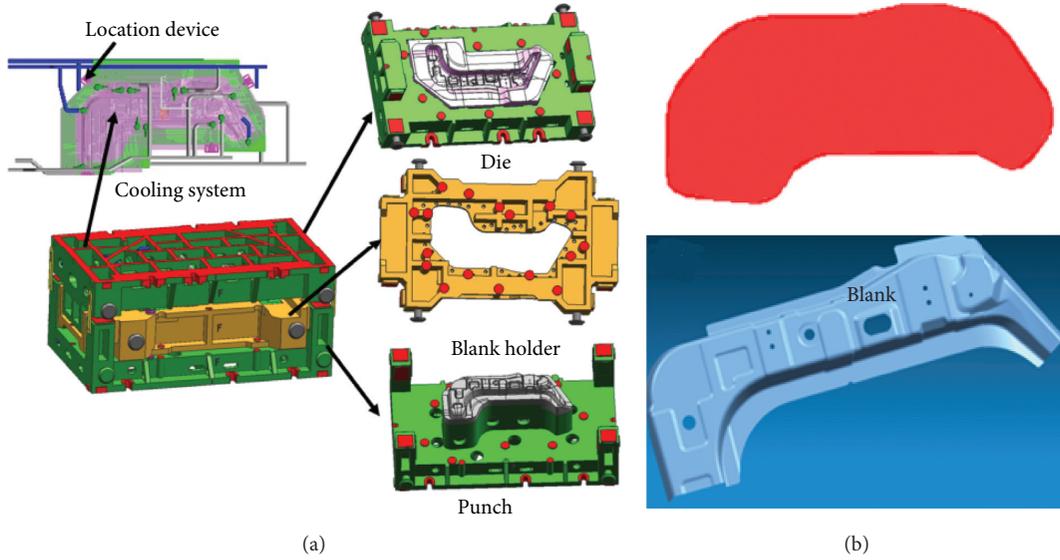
(a) Mold structure; (b) blank and formed part.
